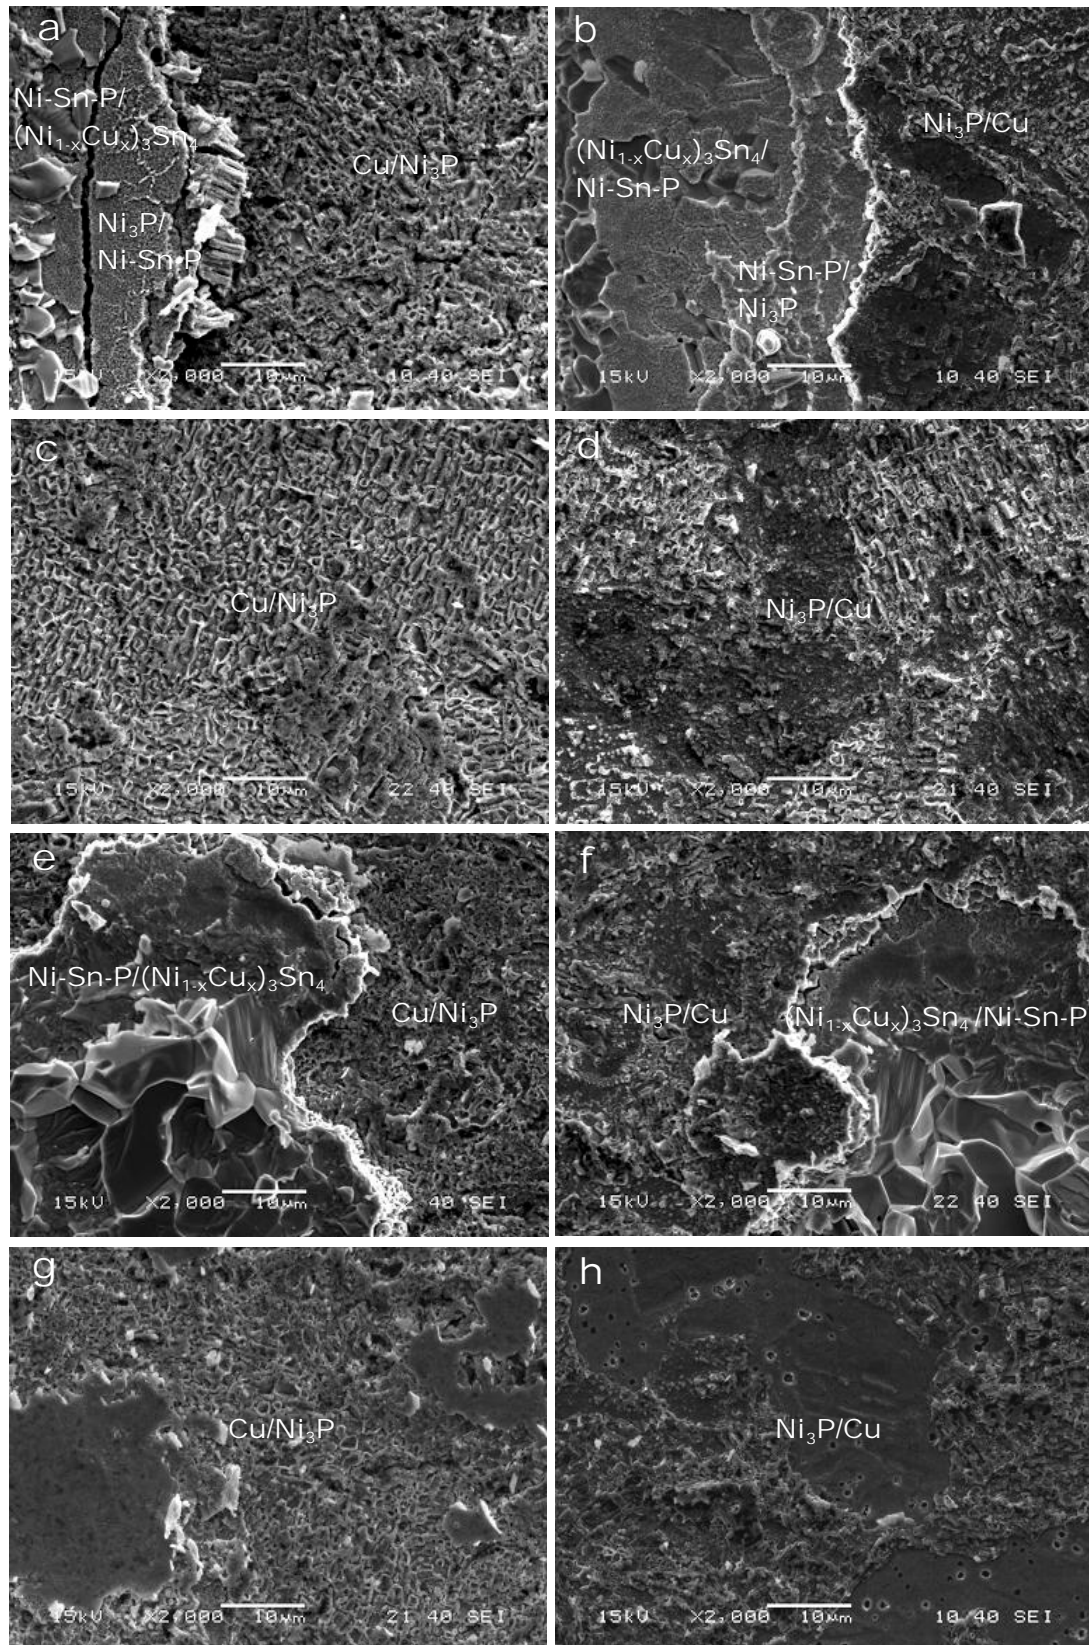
Fracture surfaces of the solder joints aged at 200°C for (a) 48 h (Cu side), (b) 48 h (solder side), (c) 100 h (Cu side), (d) 100 h (solder side), (e) 225 h (Cu side), (f) 225 h (solder side), (g) 400 h (Cu side), and (h) 400 h (solder side). Fracture occurred mainly at the $\text{Ni}_3\text{P}/\text{Cu}$ interface.
